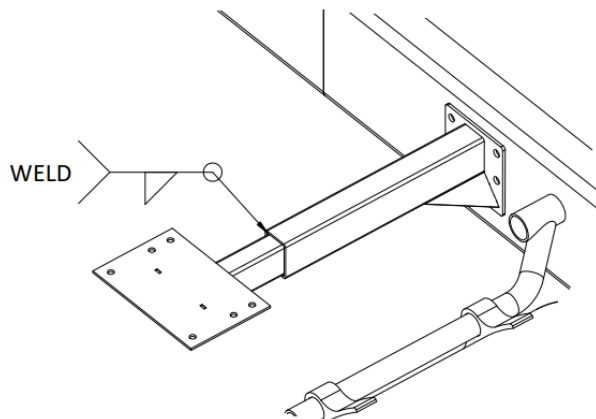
WELD OFFSET AT LENGTH
